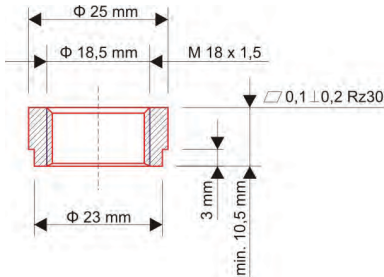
The recommended dimensions of the oxygen sensor mounting sleeve.
